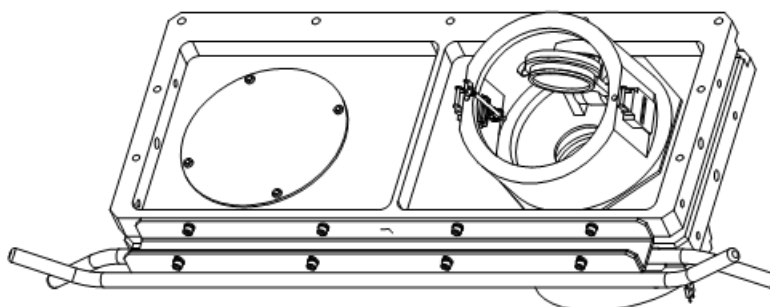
Sheet Guide Assembly for Box-Beam Type Scanners
